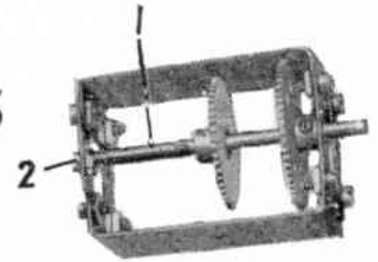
The novel bearing suggested by C. Cohen, Cape Peninsula Meccano Club, South Africa.
